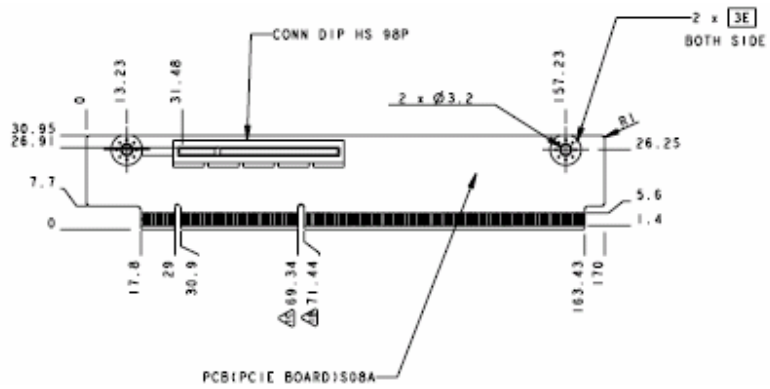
1U PCI Express* Riser Card Mechanical Drawing
